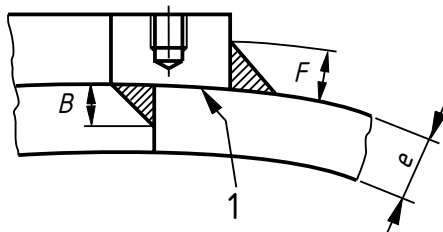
Typical weld details for connection of set-on mountings
